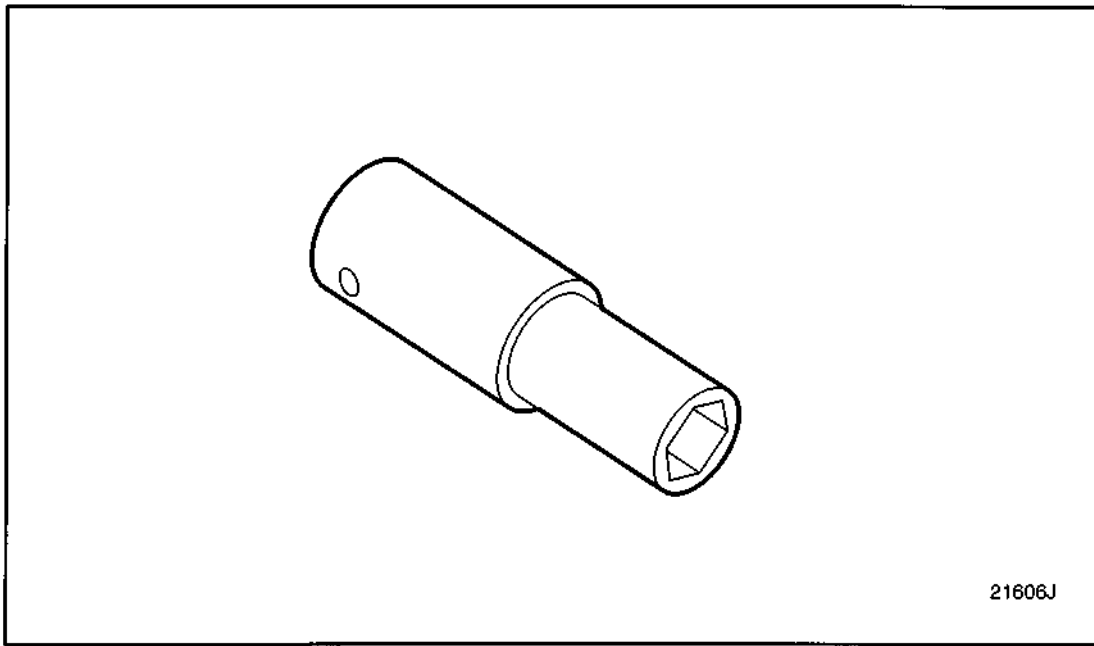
Rocker Arm Shaft Stud Socket, J 36003-A
